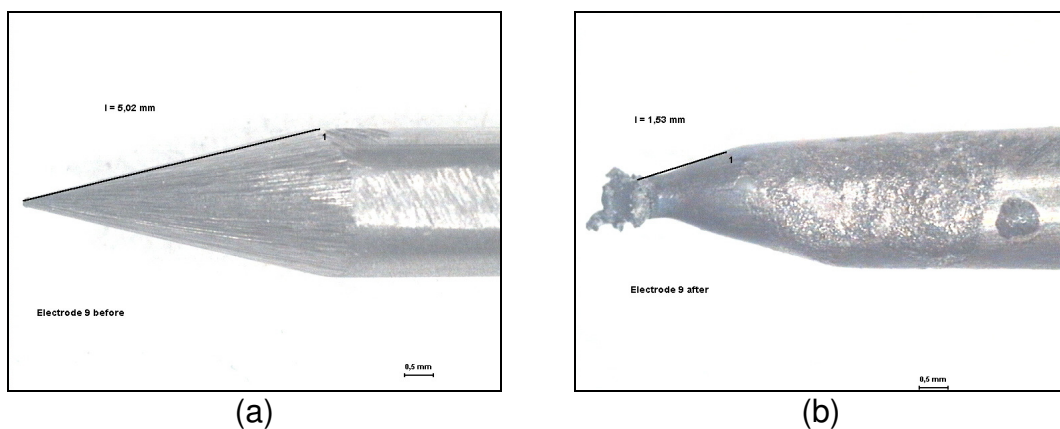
Electrode 9 used for experiment number 9: (a) before welding; (b) after welding.
